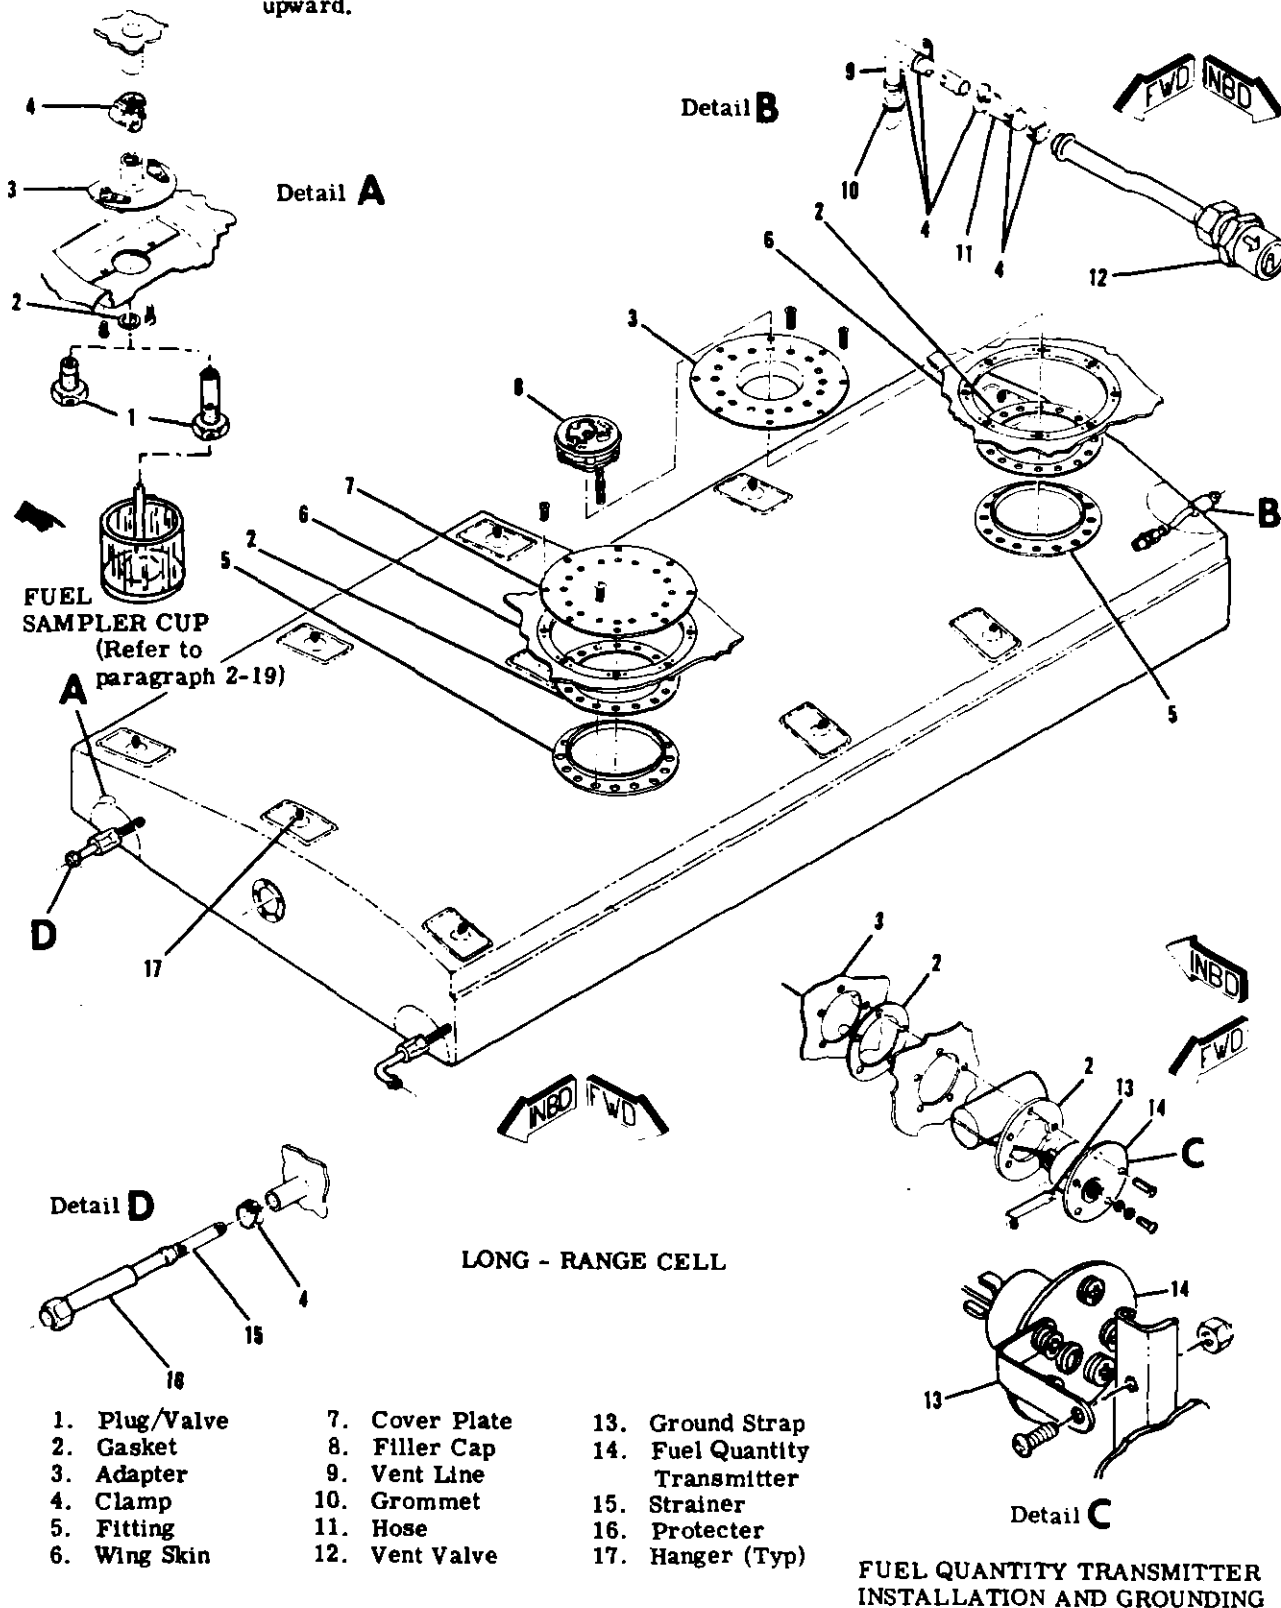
Fuel Cell Installation (Sheet 2 of 2)
